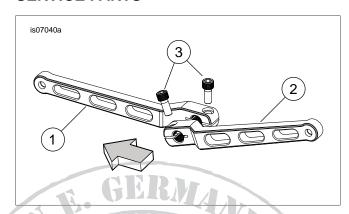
Service Parts: Extended Reach Shift Lever - Heel and Toe
